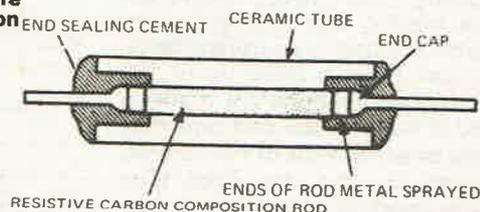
(b). Assembly of a ceramic tube type insulated carbon composition resistance.
